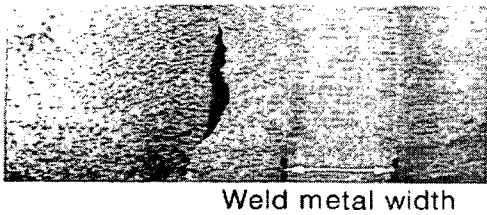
Enlarged fracture shape of the tensile test specimen Butt-jointed by FSW
